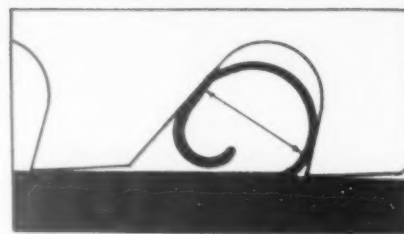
Tests on diameter of spiral chip were made with usual broach cutting angles of 15° hook and 2° back clearance.
